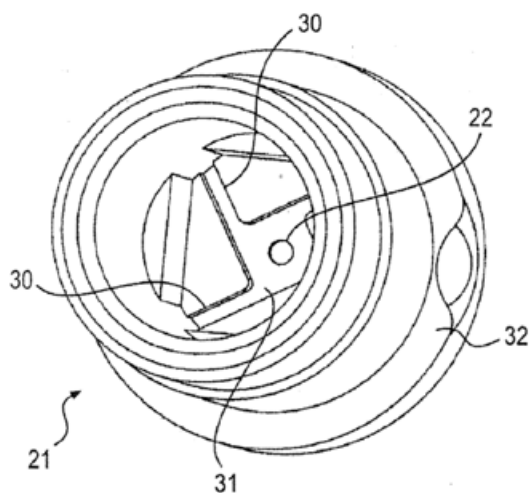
illustrates channels (30) formed at the planar interface between end wall and insert (21).
